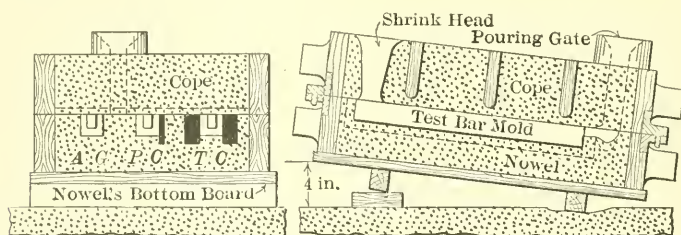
SECTIONAL VIEWS OF MOLD FOR MAKING THE SQUARE TEST BARS
